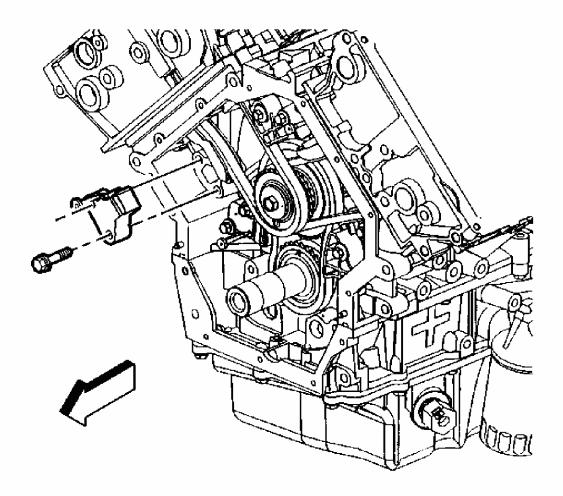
View Of Right Secondary Camshaft Drive Chain Tensioner & Bolts Courtesy of GENERAL MOTORS CORP.
